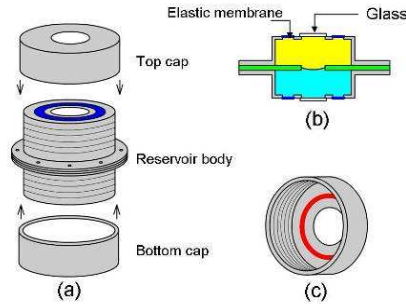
Device structure of a mechanical-wetting lens: (a) Assembled system, (b) Side view of the reservoir body, and (c) Cap with a bump inside.
